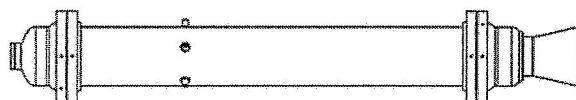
HYSR Heavy weight motor case used for Task A testing¹⁴
